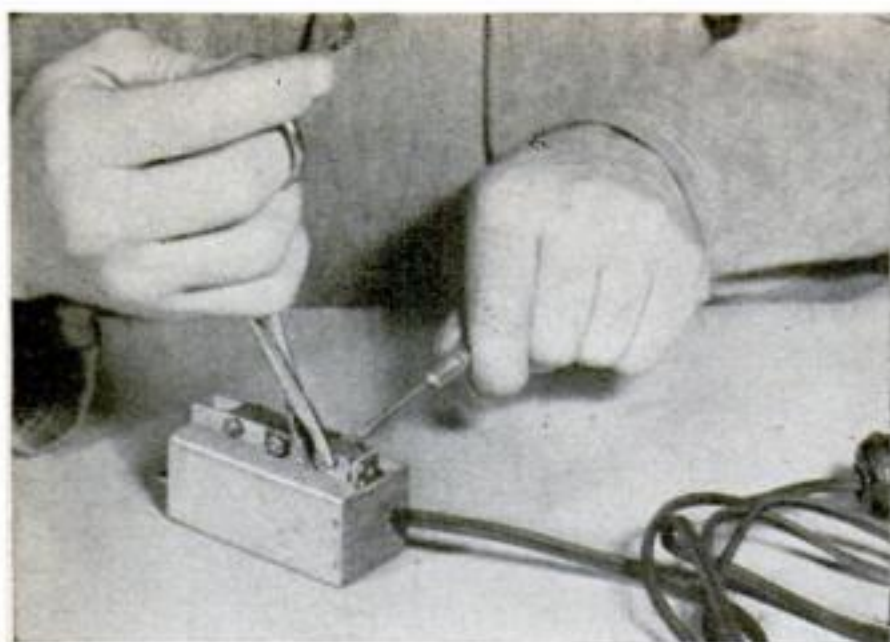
The case, bent from thin sheet metal, is attached with two small machine screws and nuts
